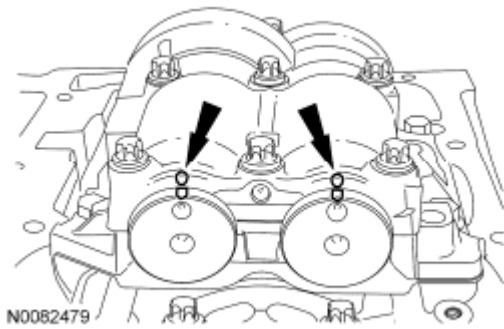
Locating Balancer Unit And Shafts Reference Mark
